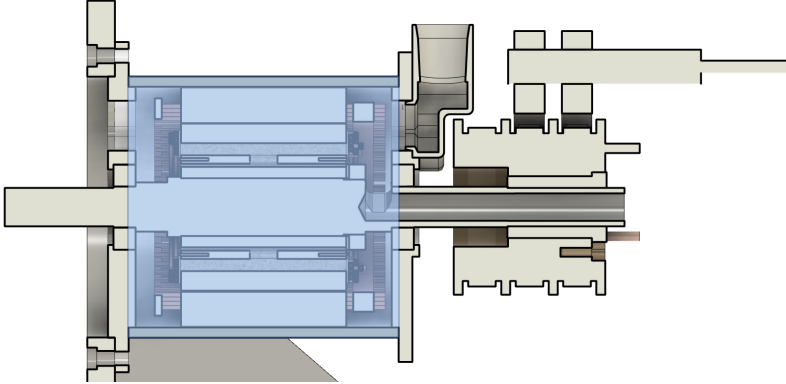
Radial cross section of the 3D CAD model of the prototype, highlighting the housing in blue.
